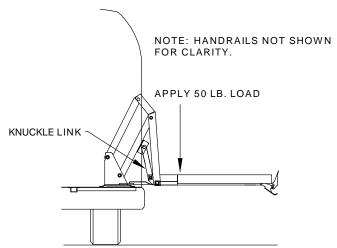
PRESSURE SWITCH TEST AT FLOOR LEVEL
